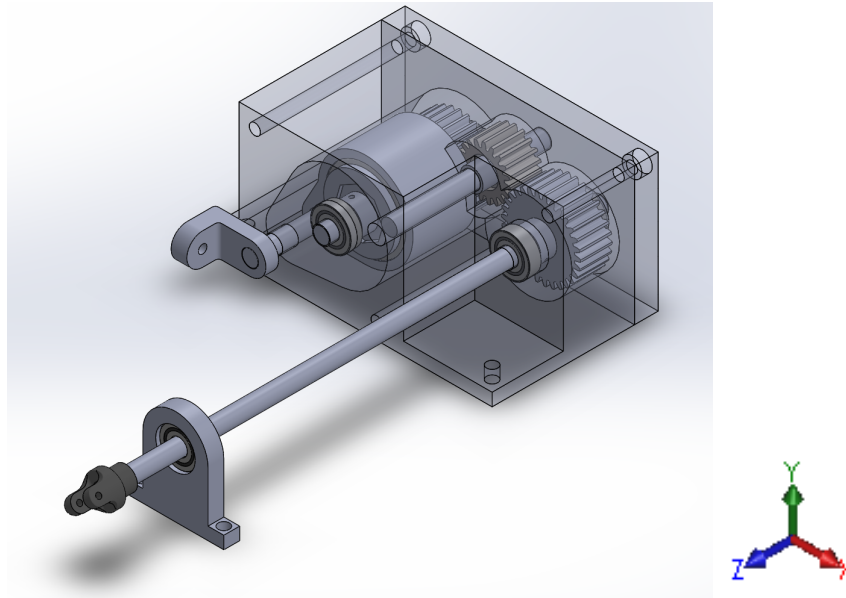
Final Solidworks Assembly of the Transfer Case
